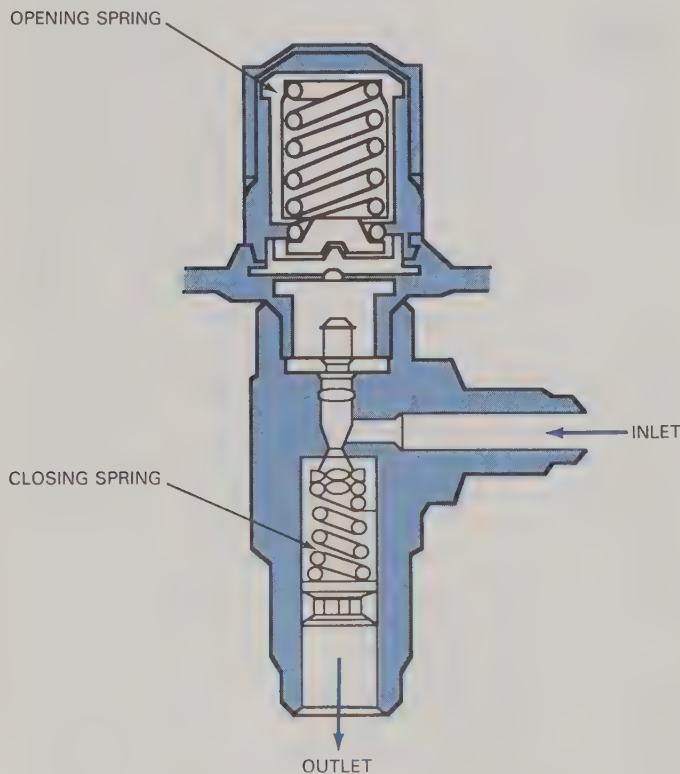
A cutaway view of automatic expansion valve operation. The adjustable opening spring in the top part of the valve forces the rod and ball assembly downward to open the valve as needed. The closing spring moves the ball and rod assembly upward to close the valve.
